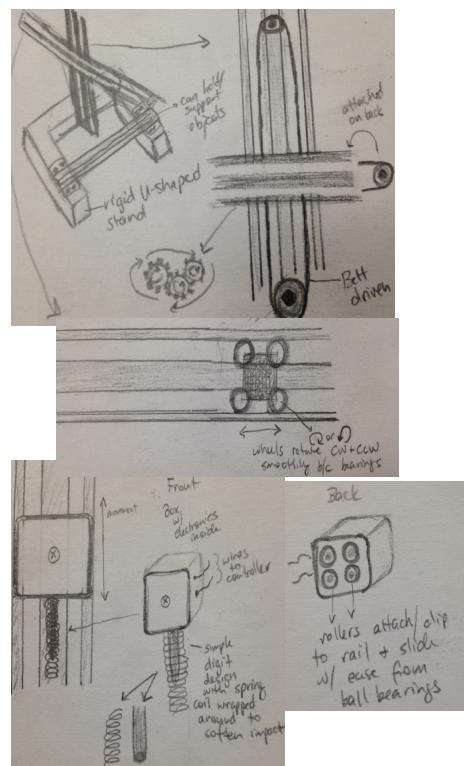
Showing a unit modeled after a homemade 3-D printing machine
